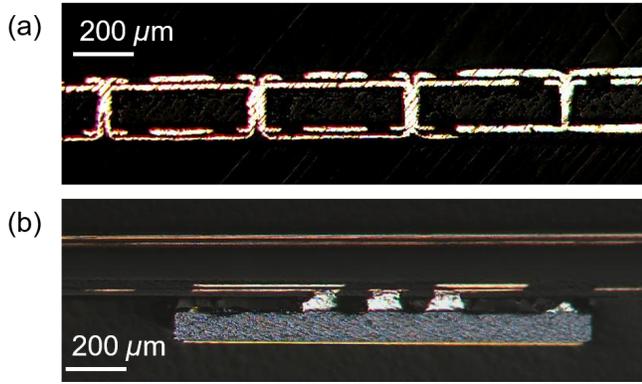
Microscope cross-sectional images of fabricated panel with the four RDLs. (a) TPVs, microvias. (b) Assembled LNA using 80- μm solder balls.
